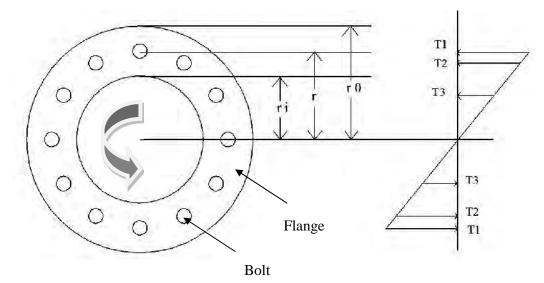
Plan and force distribution of a typical flanged pipe joint
